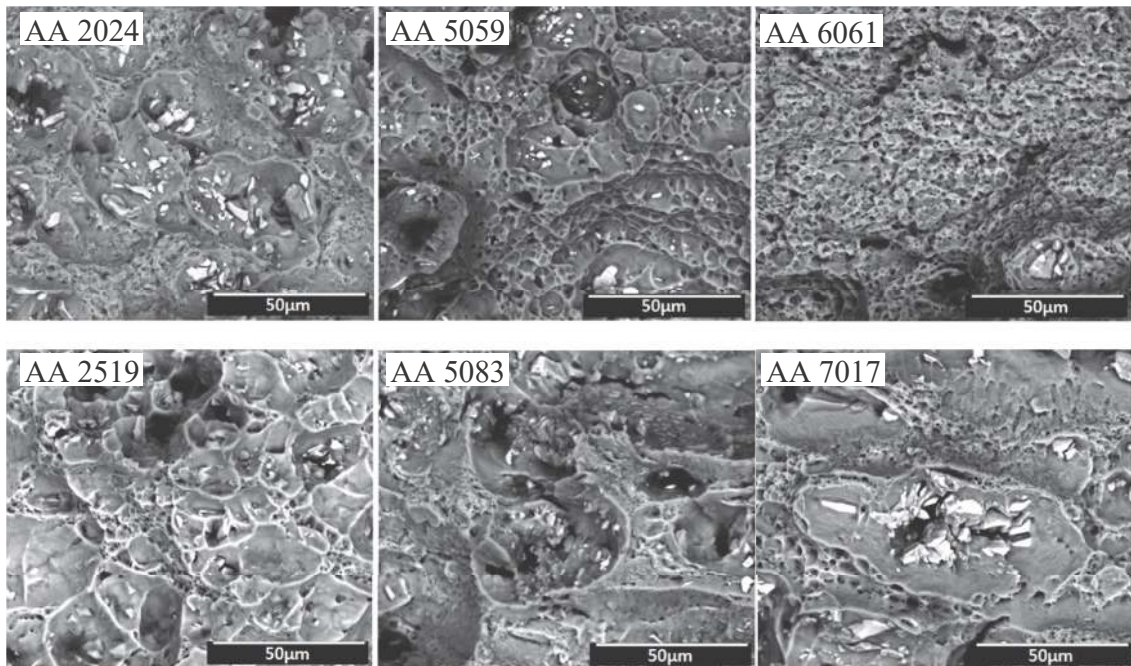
Fractographs of Charpy impact fracture surfaces of different aluminium alloy plates.
